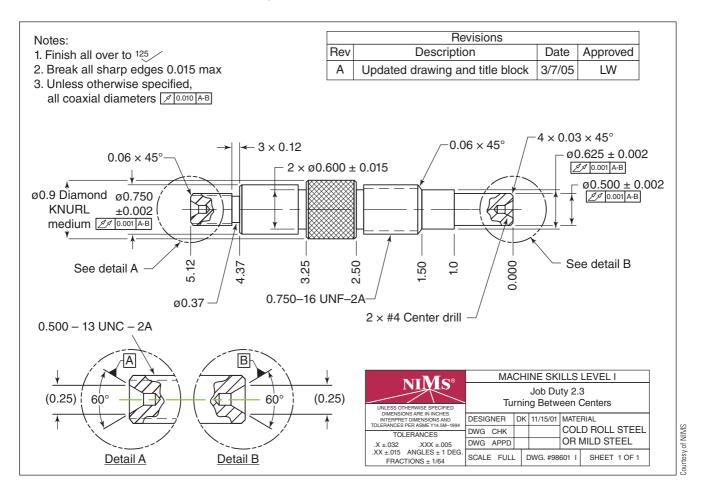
An example of some engineering drawings, or prints, showing the shape and specifications of components to be produced by machining operations.
